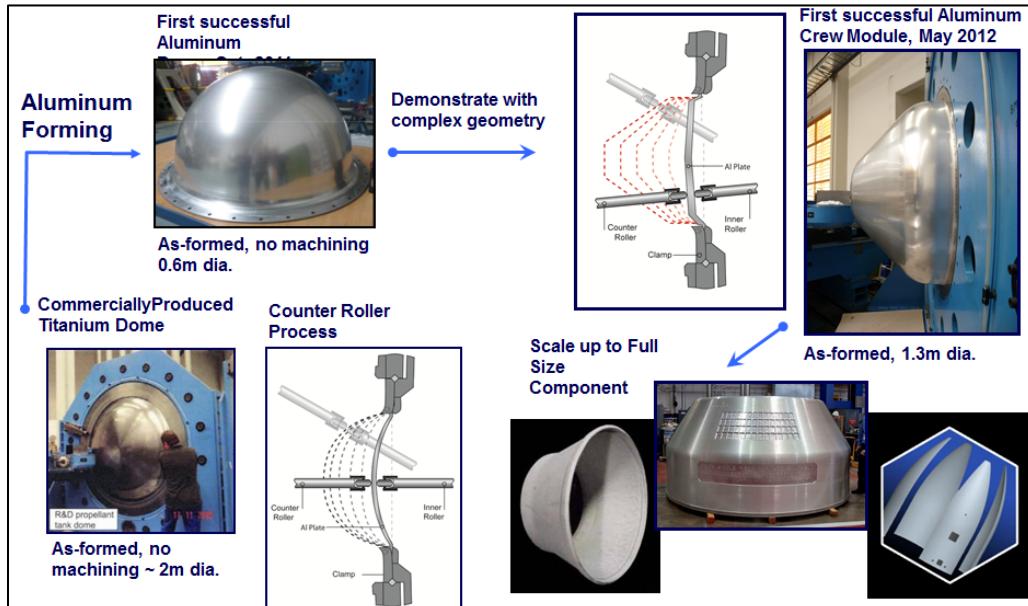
Adaptable Tooling for Counter Rolling Space Launch Vehicle Components.
